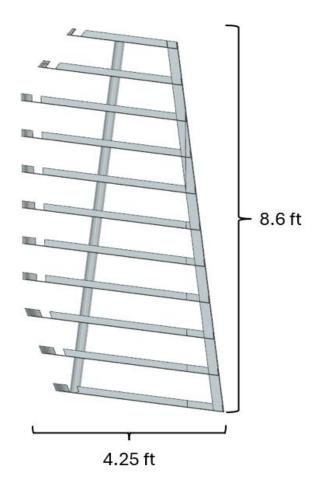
DIMENSIONED VIEW OF RUDDER
